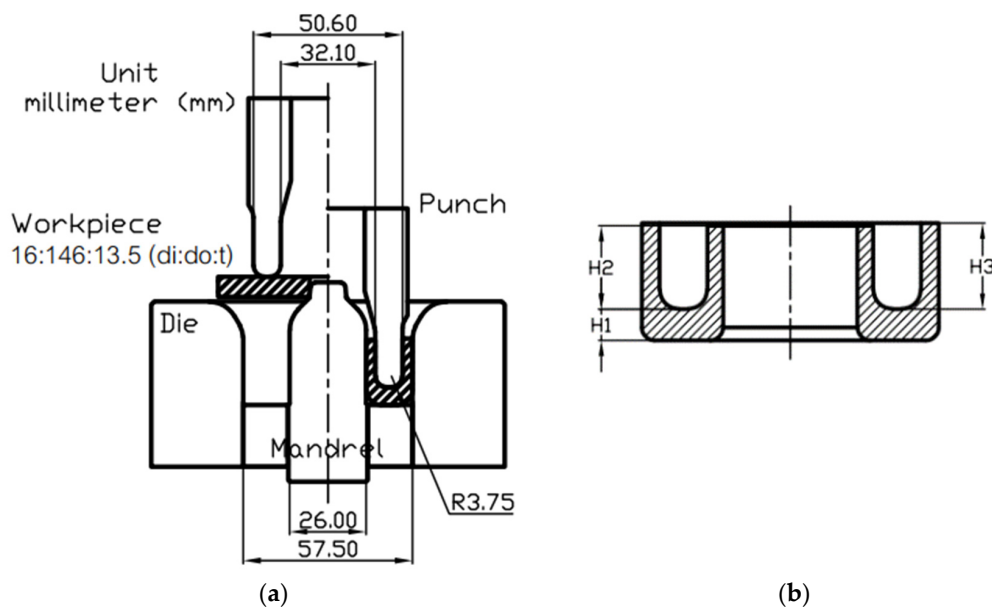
Combined drawing and ironing process: (a) tool components; (b) preform shape of the pulley.
